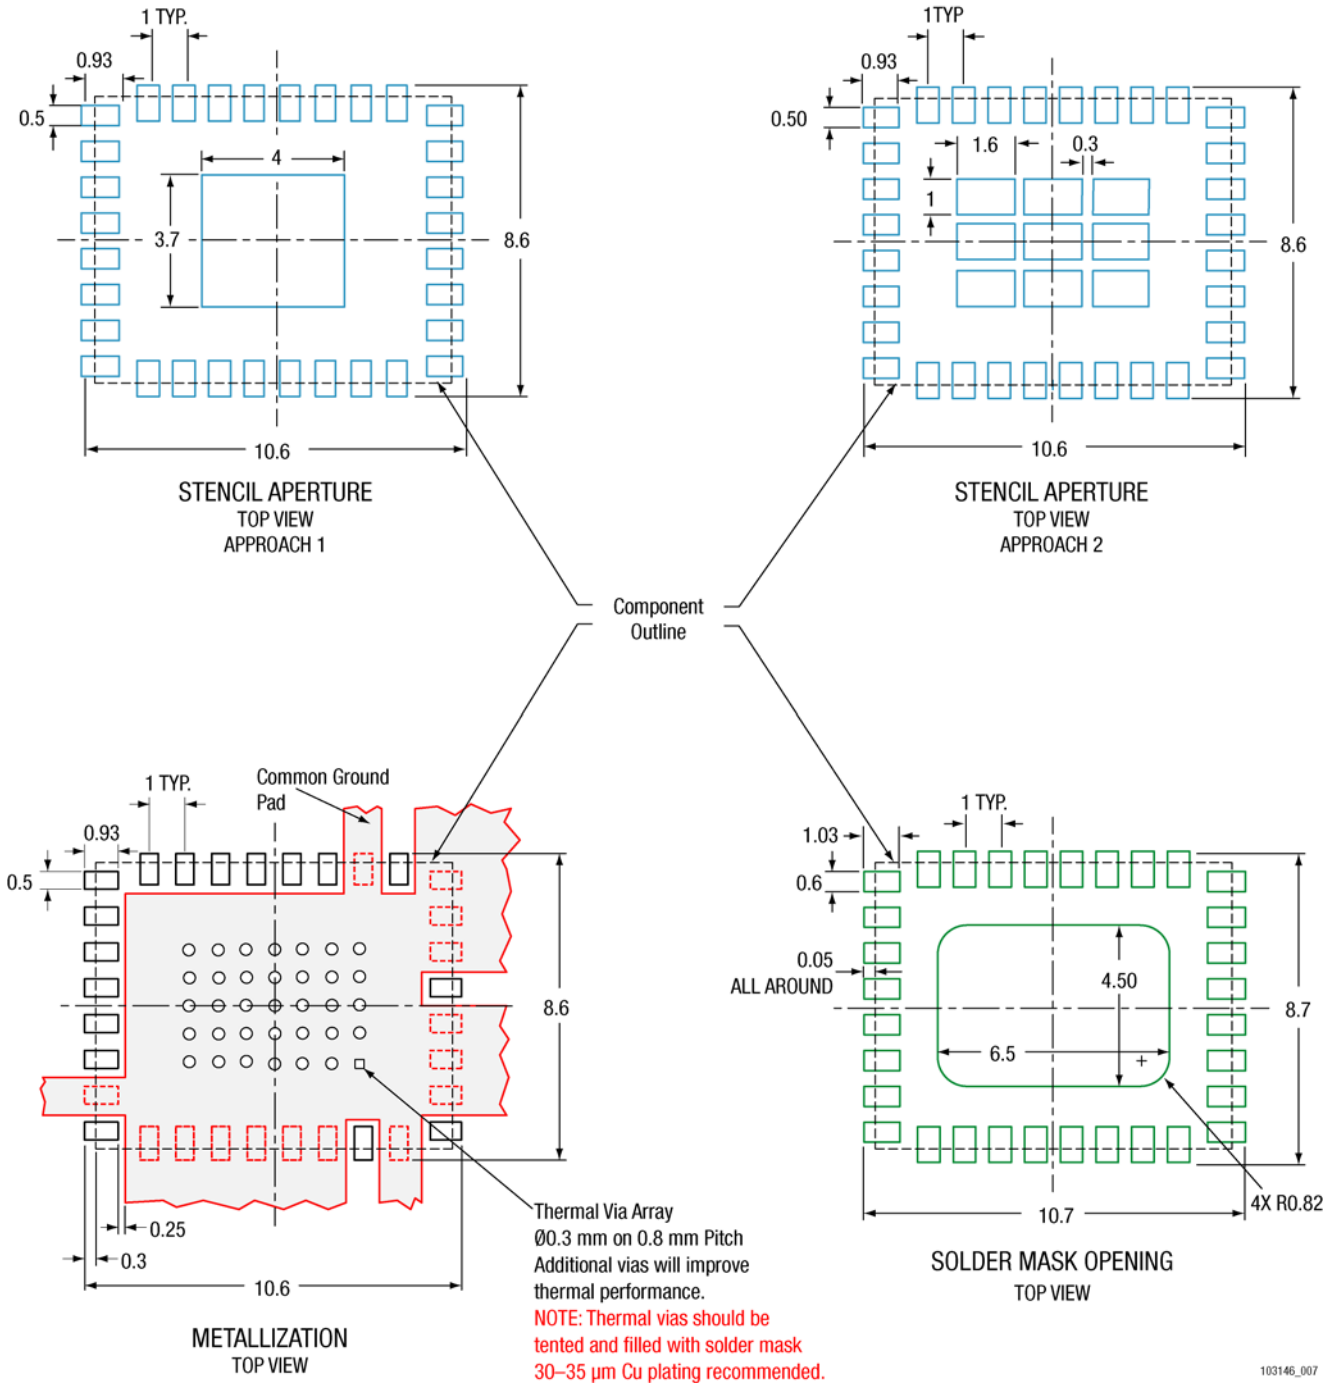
Phone PCB Layout Footprint for 8 x 10 mm, 32-Pin Package – SKY77500
